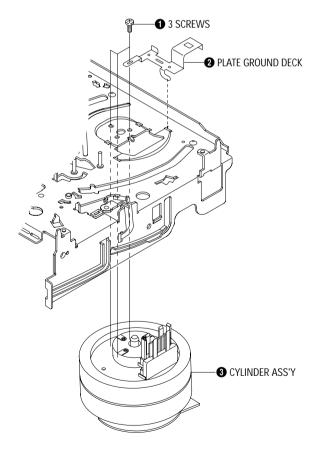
Plate Ground Deck, Cylinder Ass'y Removal
